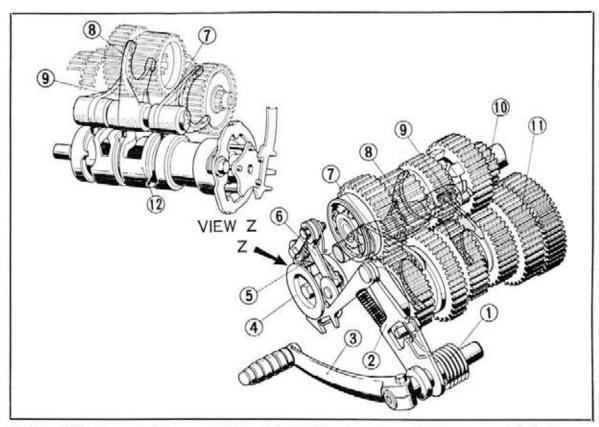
F 5th gear (M₂-M₃ gear shifted)
